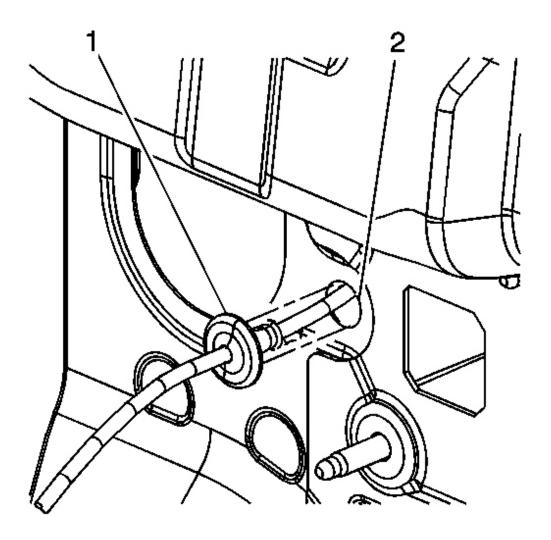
View Of Hood Latch Cable Routing Courtesy of GENERAL MOTORS CORP.
